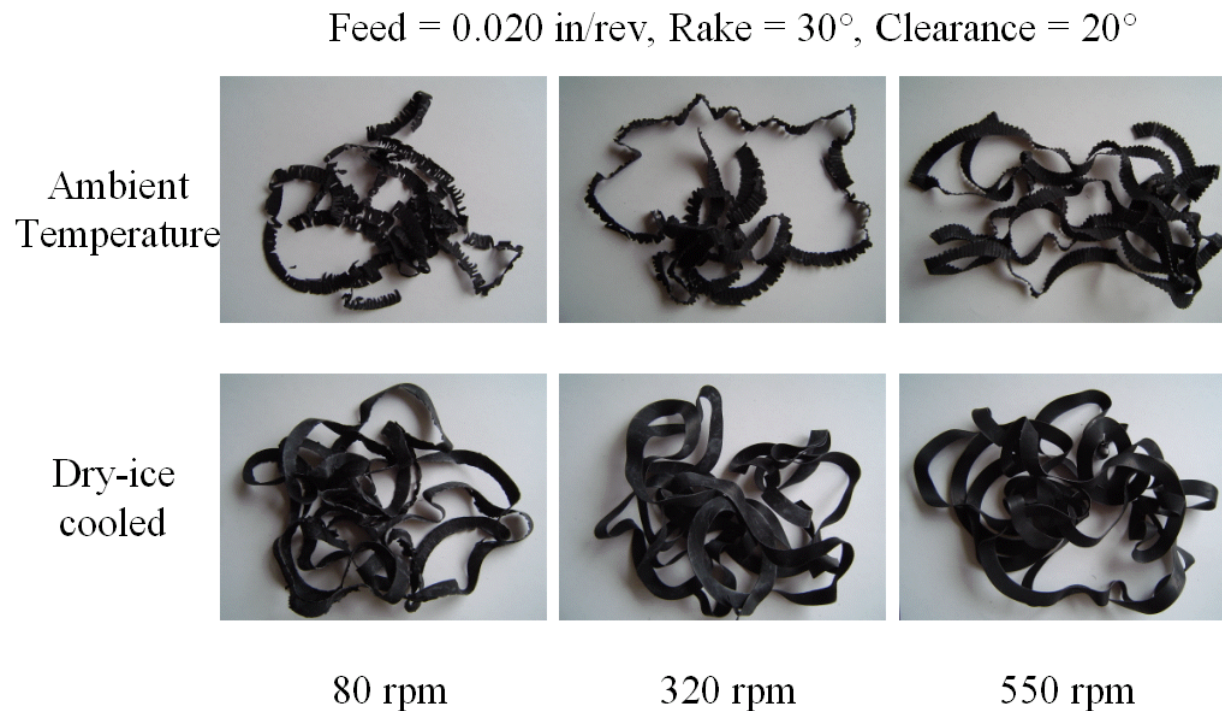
Photos of chips with workpiece temperature and cutting conditions.
